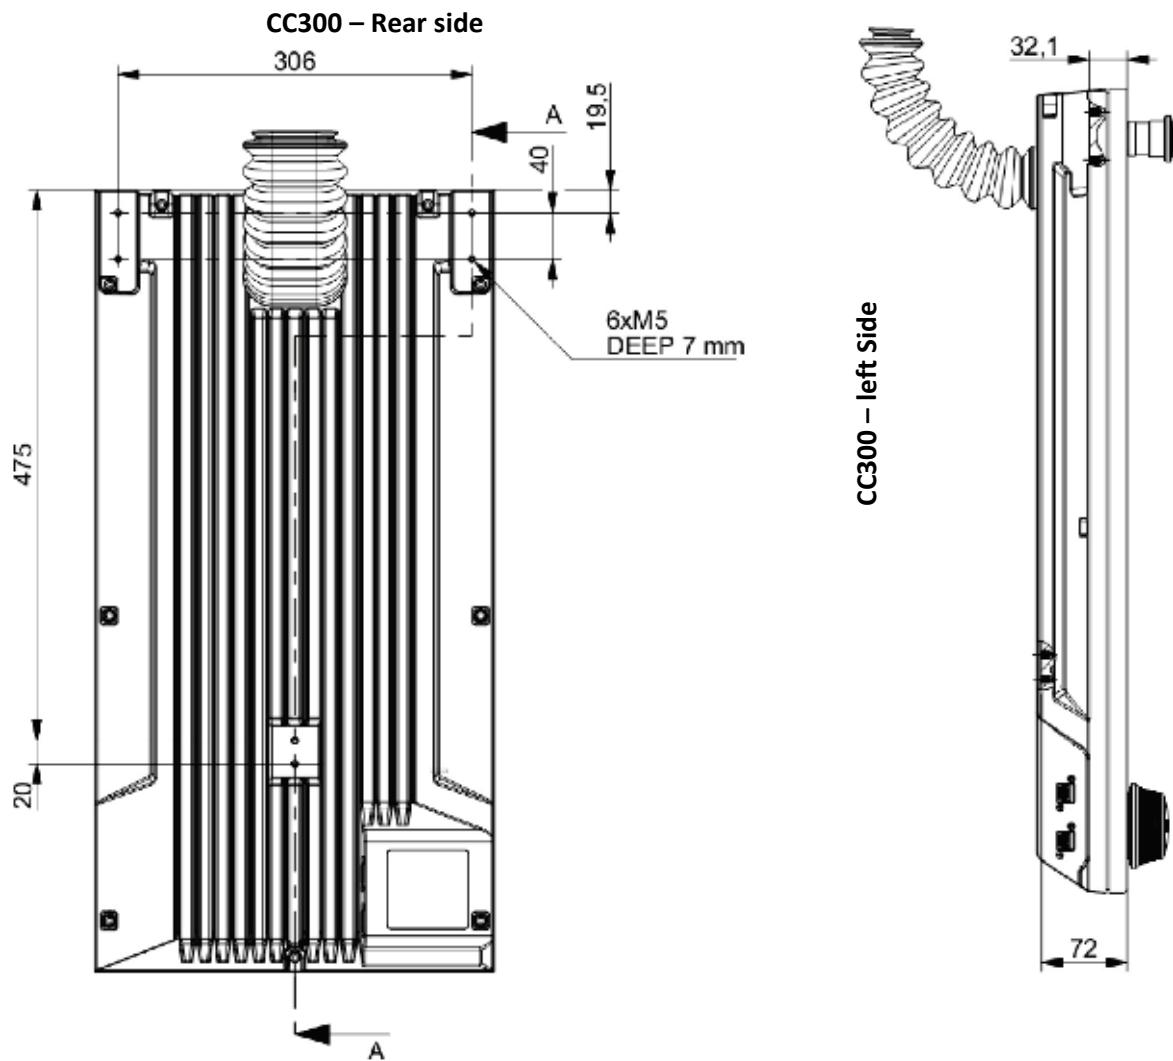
Dimensioned rear and side view of the CC300 operator panel
